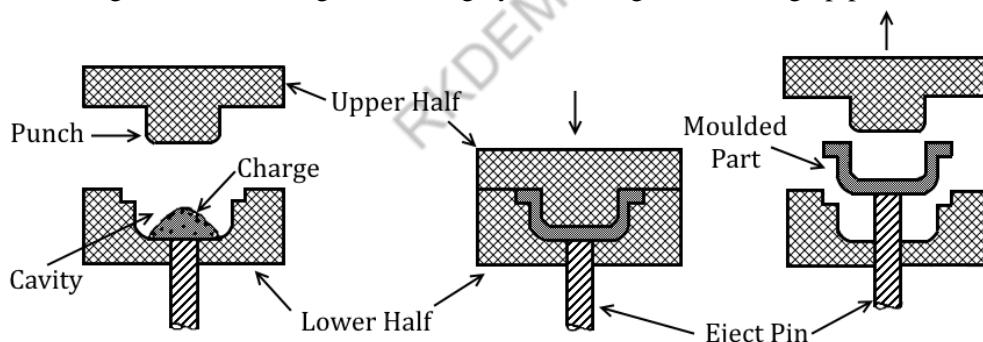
Fabrication by Compression molding for thermoplastics: (a) charge is loaded, (b) charge is compressed, cured, and (c) opening the mold halves and removing the part from the cavity.
